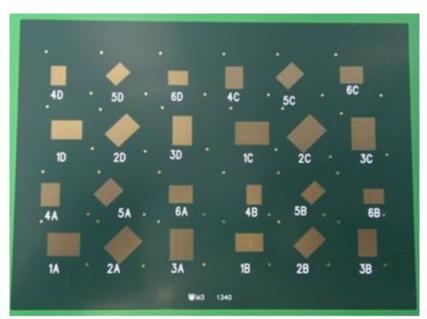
Test board with the pad designs and sections illustrated (Sections 1, 2, and 3 were 01005 arrays)
